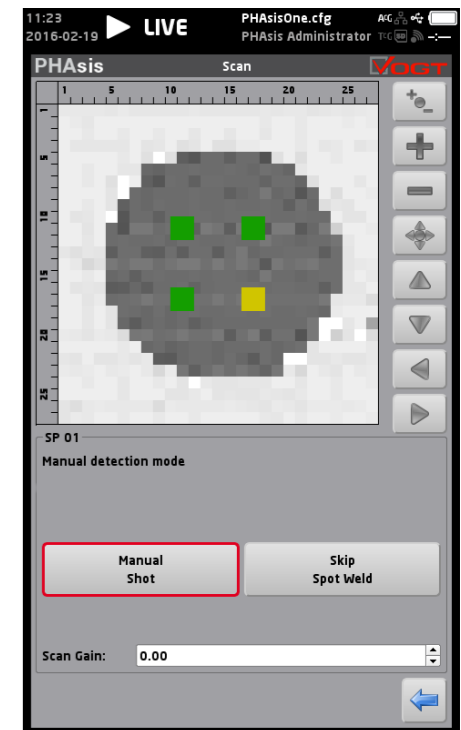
Live D-Scan for positioning and vertical focussing of the probe on the spot weld surface
